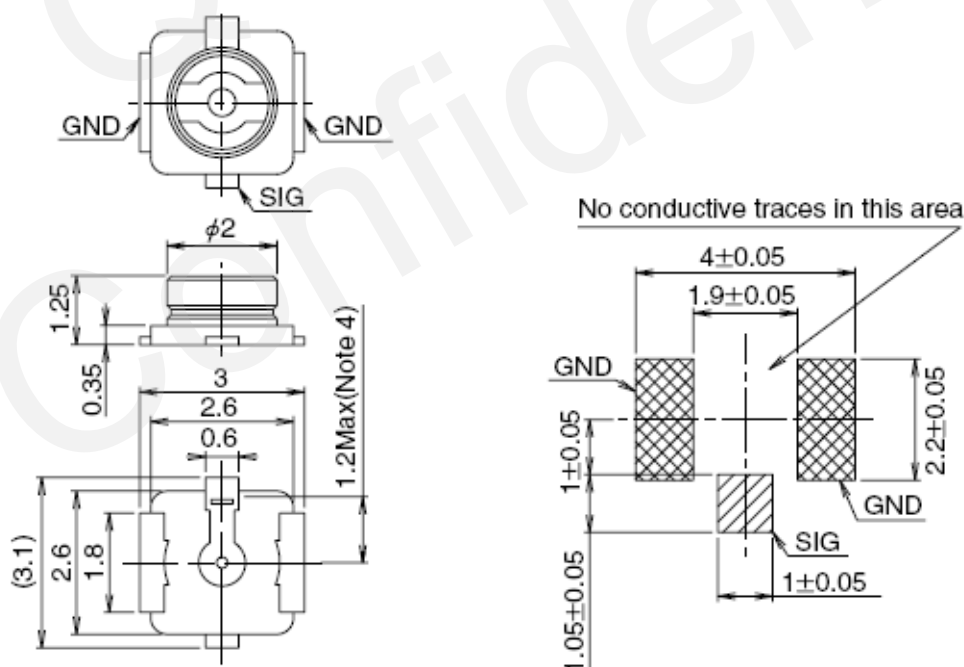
Dimensions of the UF.L-R-SMT Connector (Unit: mm)
